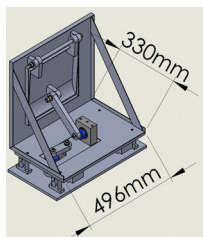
Dimensions of the back pad's supporting platform surface.
